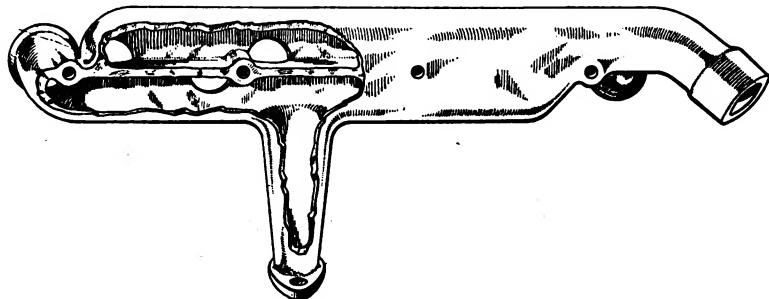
Type of Combination Inlet and Exhaust Manifold Which Improves Vaporization
